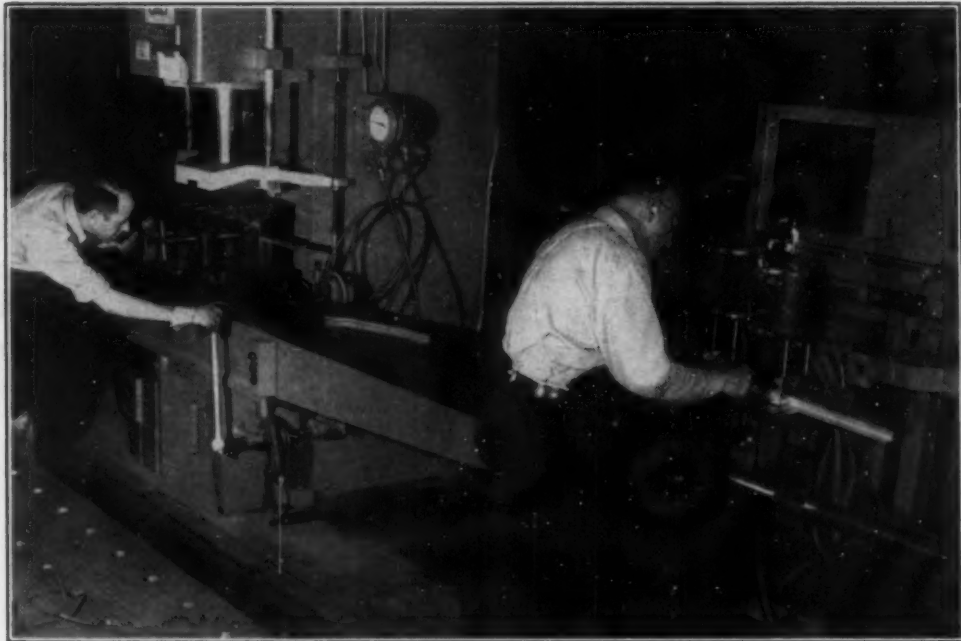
Punch Press Forming 75S-T6 Extrusions Preheated by Resistance Heating Method.
